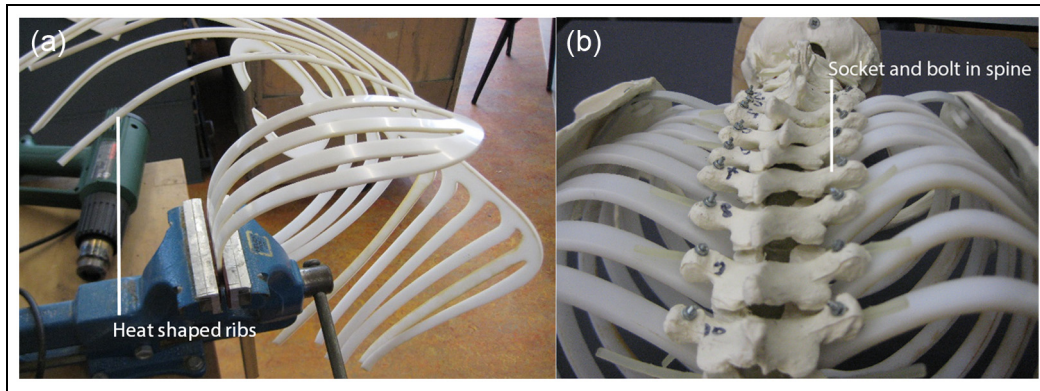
(a) An anatomically correct rib cage cut from 4-mm-thick POM material being bent into shape. (b) The rib cage socketed in and bolted to the spine.
